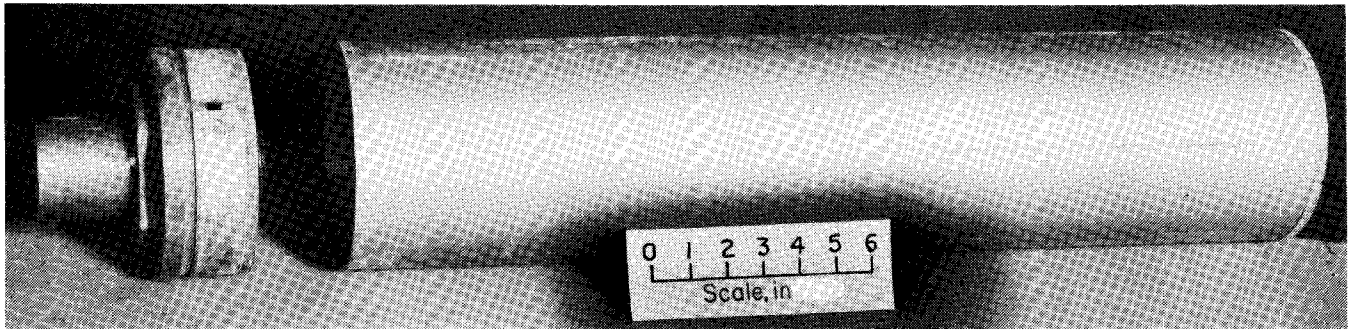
Expander head assembled (adapted for BX wire line drill rod) and 6-in-diam core barrel.
